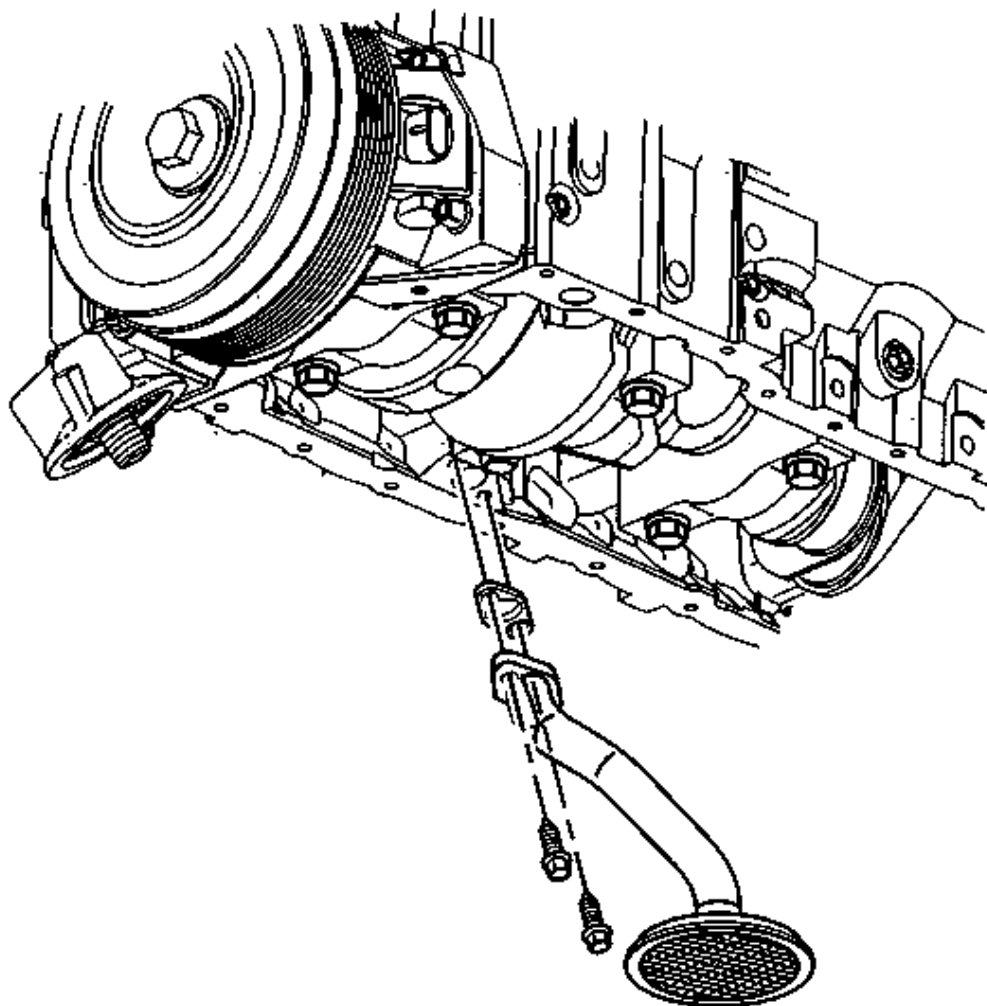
Installing Oil Pump Pipe & Screen Assembly
